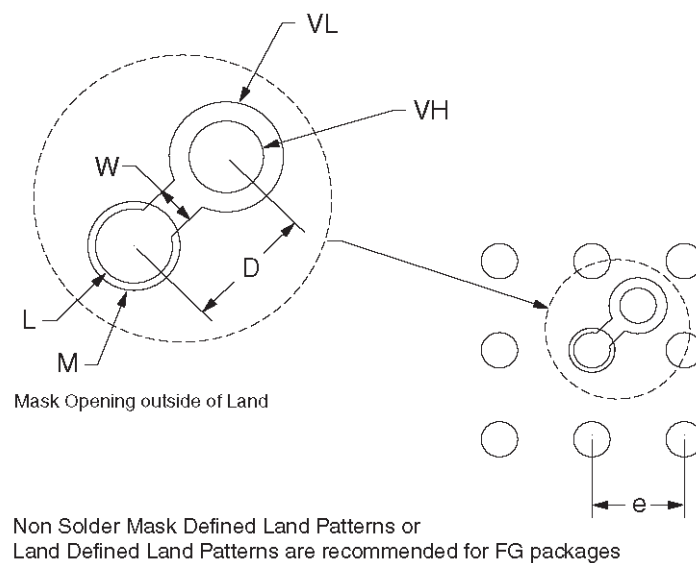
Suggested layout for BGA package (*Courtesy: Xilinx Inc*)
